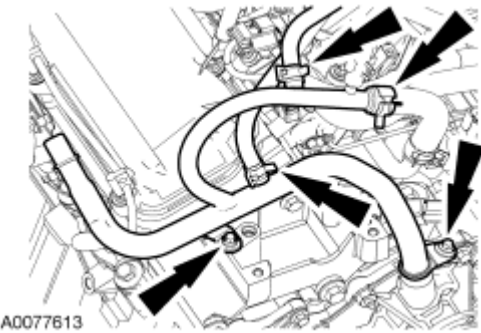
Locating Coolant Pump Outlet Tube Bolts
